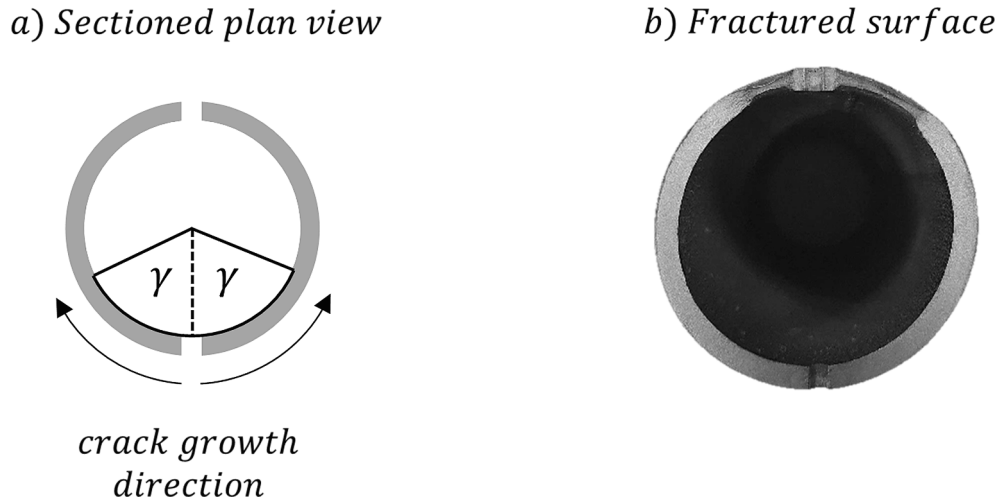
(a) Schematic view showing crack growth shape and crack angle definition and (b) specimen fractured surface due to fatigue test.
